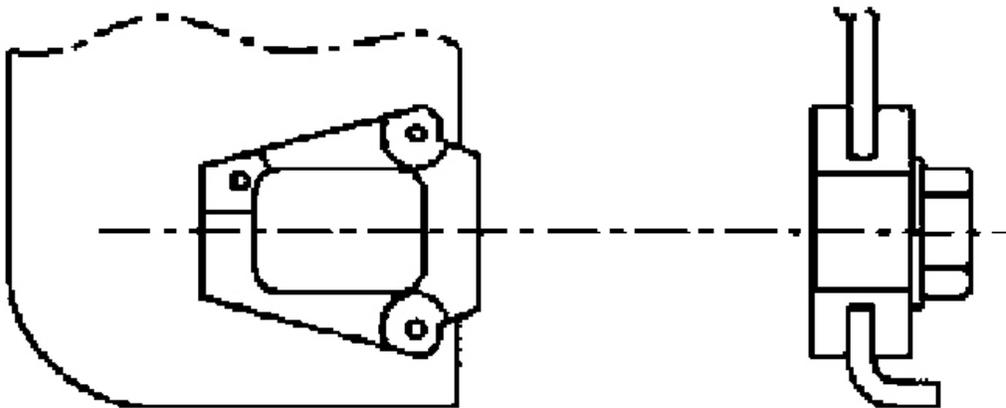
View Of Capsules On Steering Column Bracket Assembly
